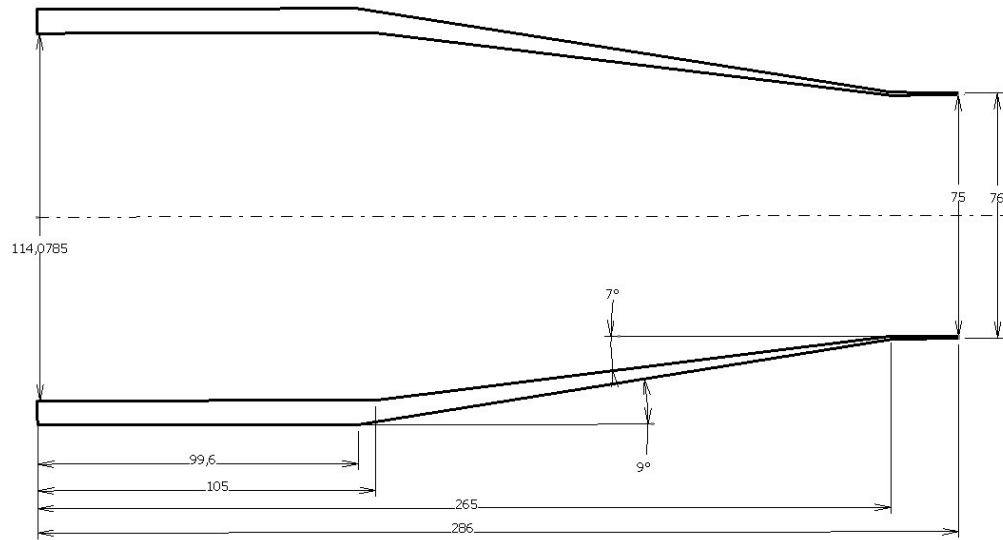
Sketch of the 75 mm nozzle used on the coaxial study.
